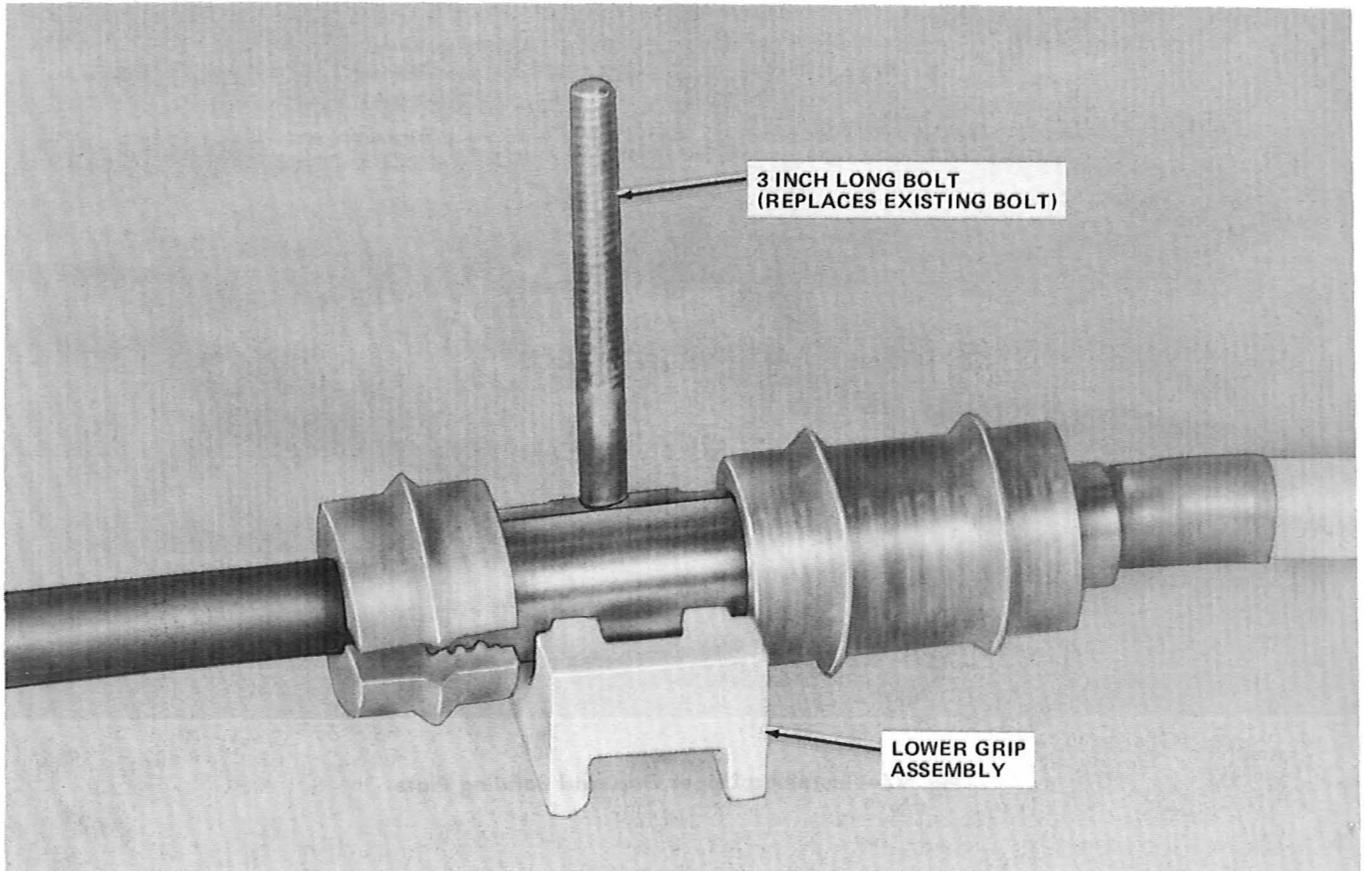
Placing 3-Inch Long Bolt Into Lower Grip Assembly
